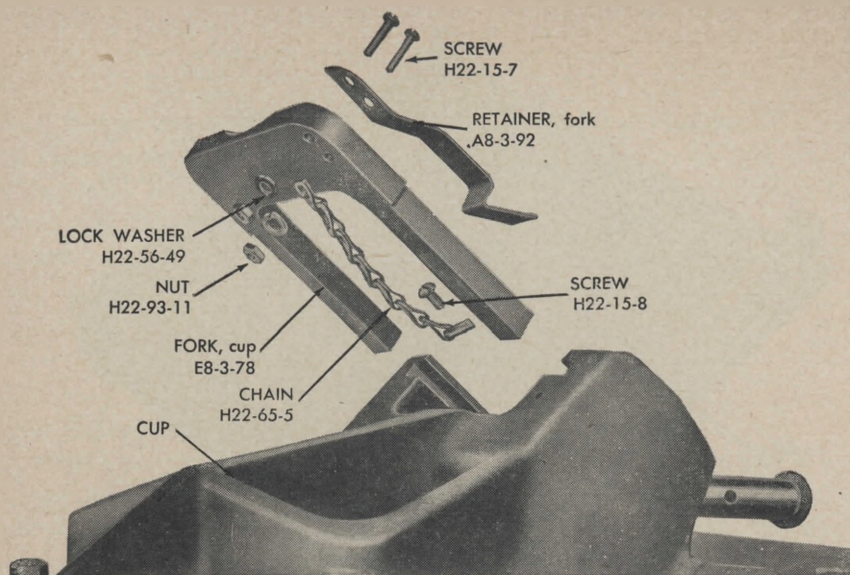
Exploded view of cup fork assembly in relation to cup.
